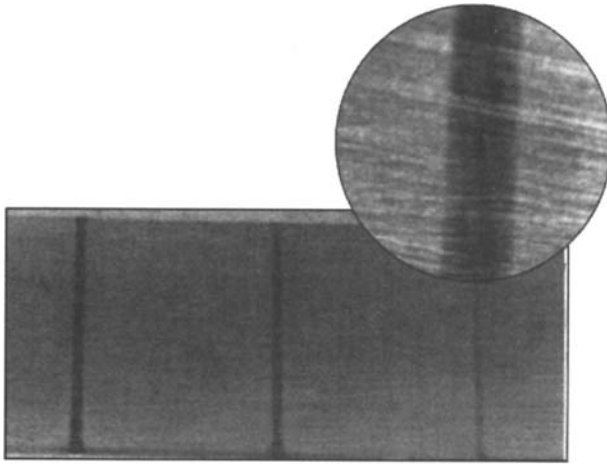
Brinelling impact damage to a bearing race. (Courtesy of The Timken Company, Canton, OH.)
